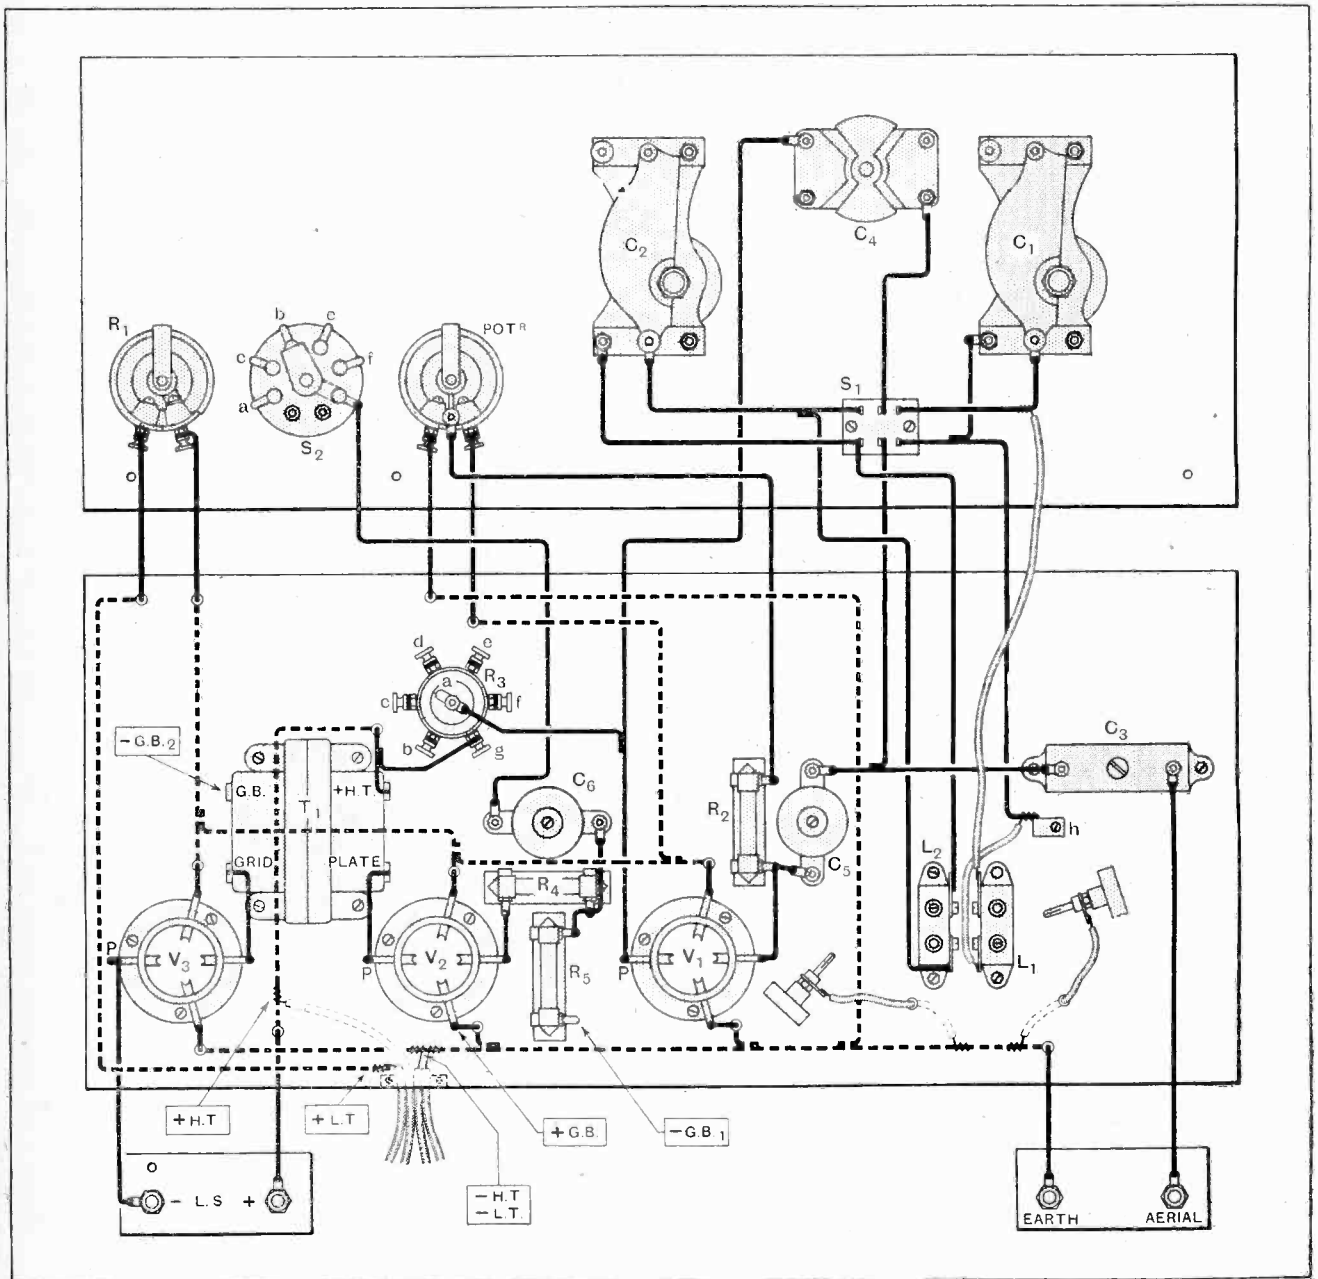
The practical wiring plan. The taps on  $R_3$  connect to similarly-lettered points on switch  $S_2$ .
